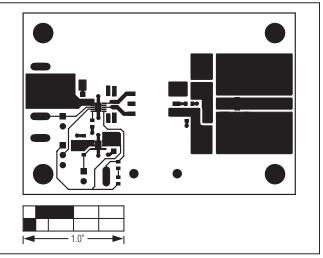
MAX13256 EV Kit PCB Layout—Component Side
